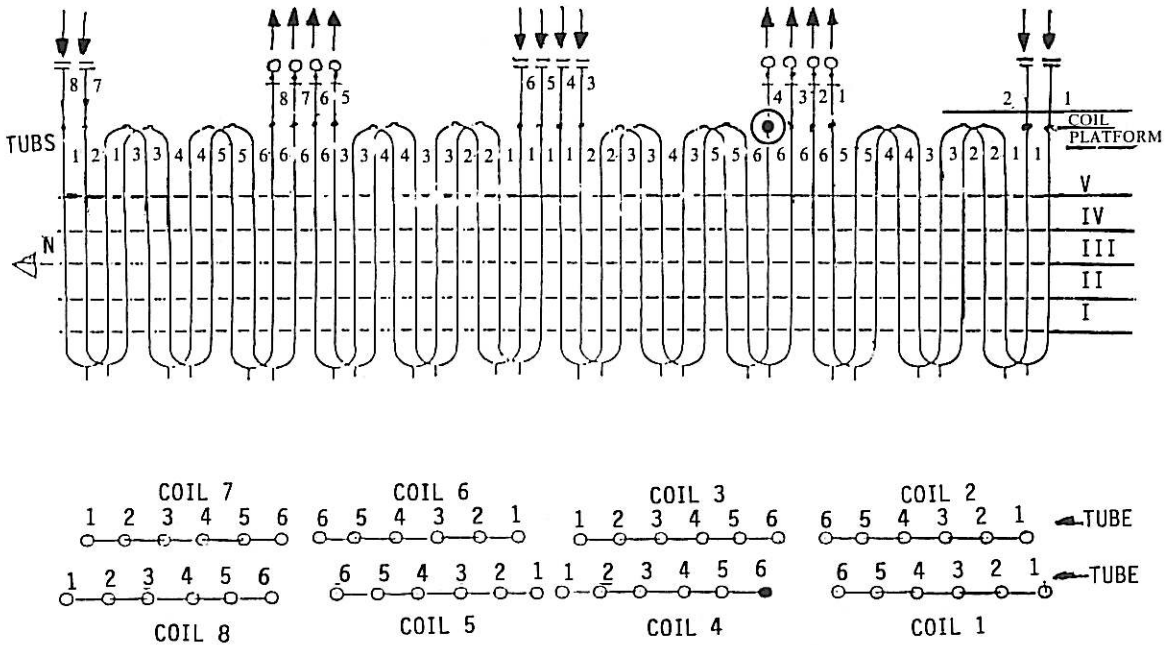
Sketch of the radiant coil of cracking furnace 1-F-10-G with the location of crack (encircled).
